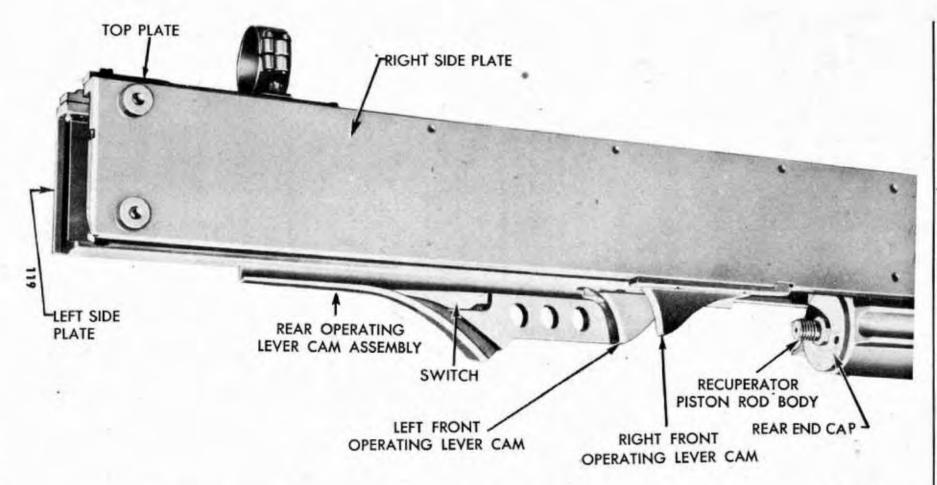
Receiver Group (Gun AN-M4) With Recuperator Parts Assembled
